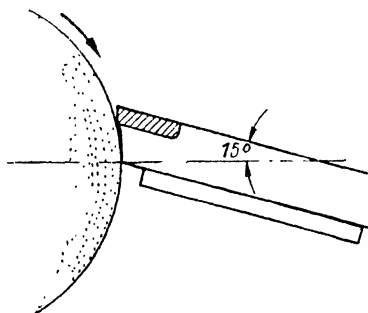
Effect of hollow grinding when using the periphery of wheel
